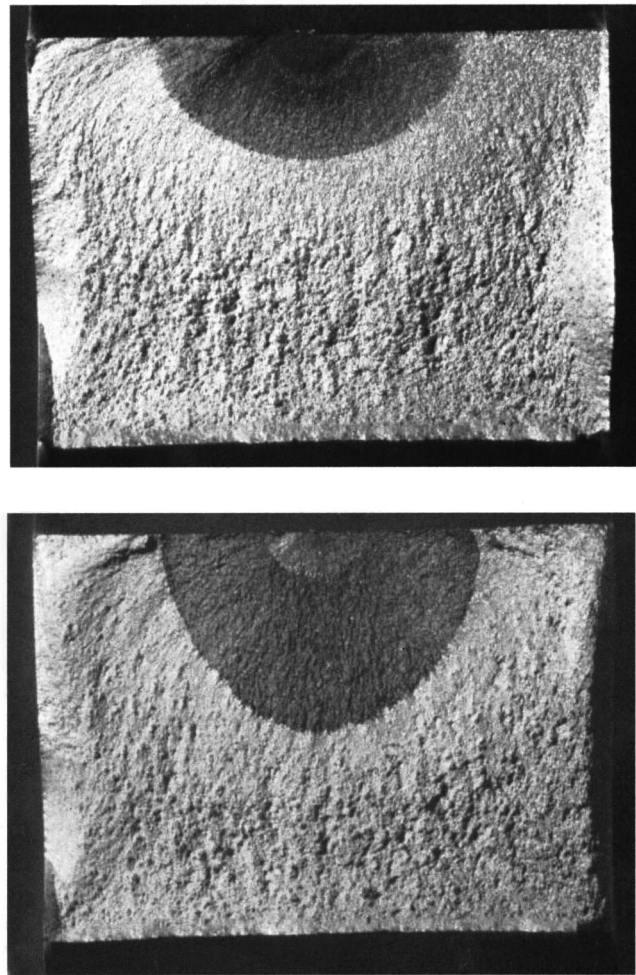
Fatigue cracks developed in IN718 under hard vacuum (top) and atmospheric pressure (bottom) at 600°C
